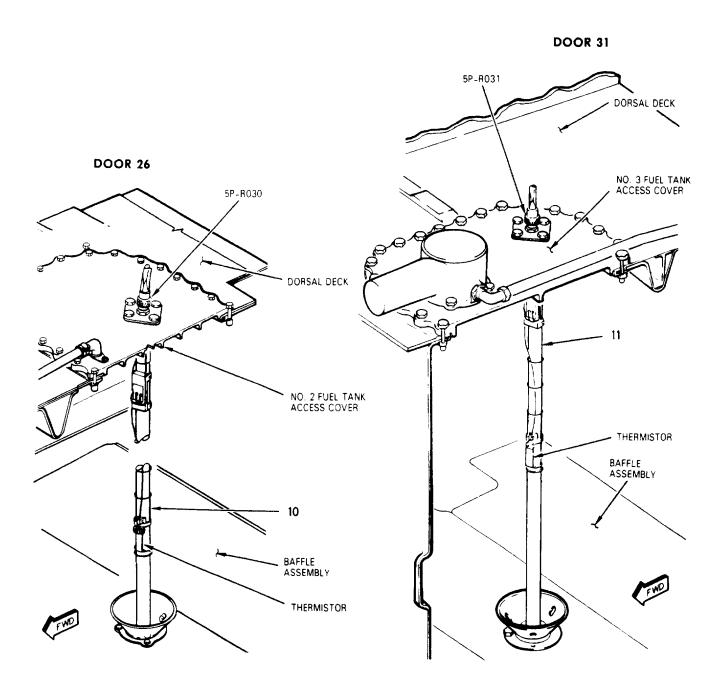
Fuel Quantity Gaging System Component Locator (Sheet 7)
